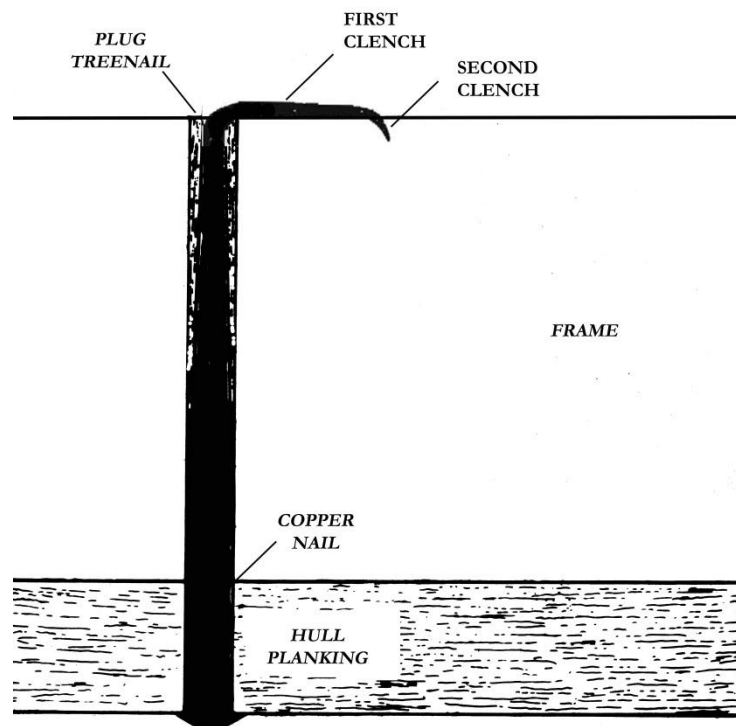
Nail double clenched to inner face of a frame (profile view). Drawing by the author.
